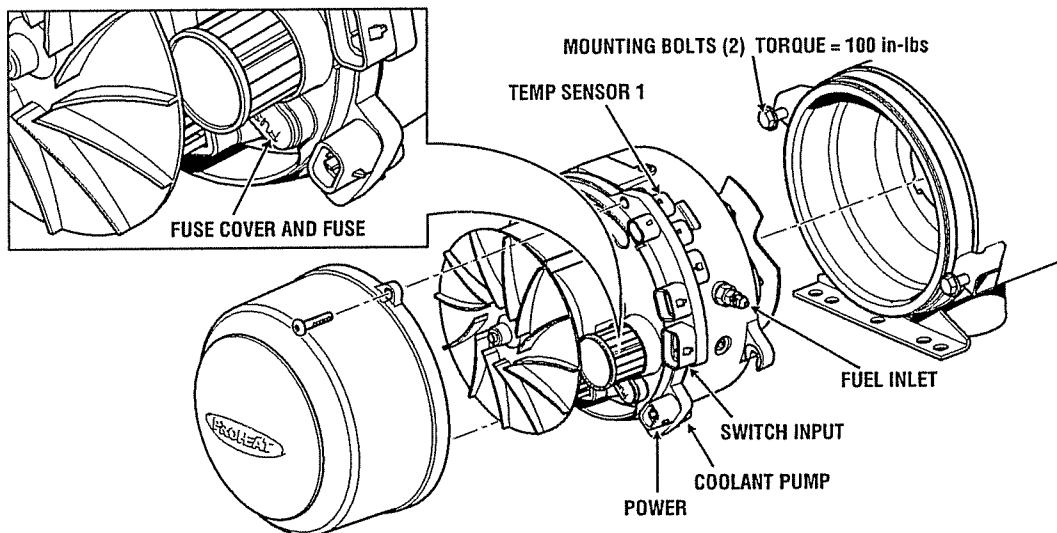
Burner Head Removal and Motor Mechanical Check
